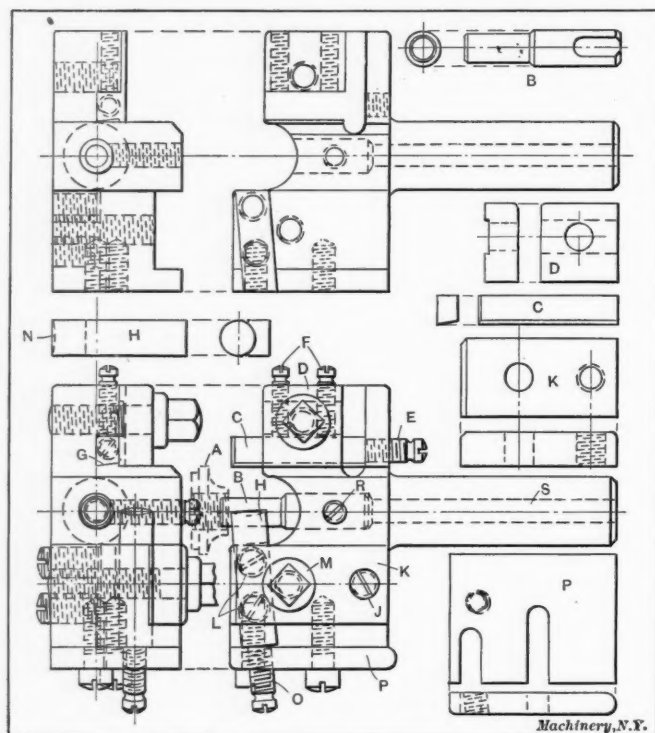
Finishing Box-tool for Ball Bearing Cone
